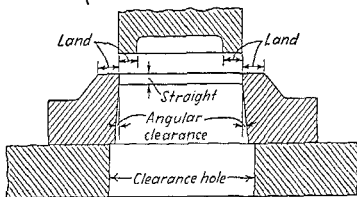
Schematic drawing showing straight, land, and angular clearances.³
